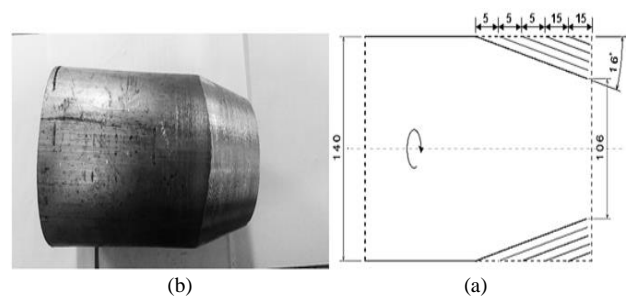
(a) The roller path in five passes of forming the cone. (b) formed tube
